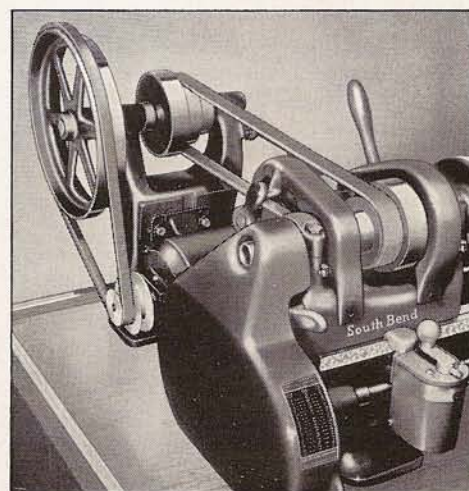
End View of 9-inch "Workshop" Twelve-Speed Lathe Showing Two-Speed Countershaft
